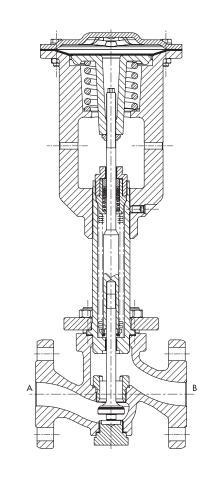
Type 3351 Pneumatic On/off Valve · Version with bellows
